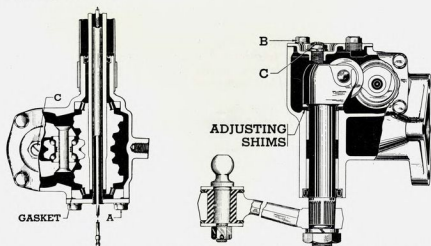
Steering Gear is of the Integral Housing Type. Wormshaft Bearings and Roller Mesh Should be Adjusted to a Slight Drag as Outlined in Text
